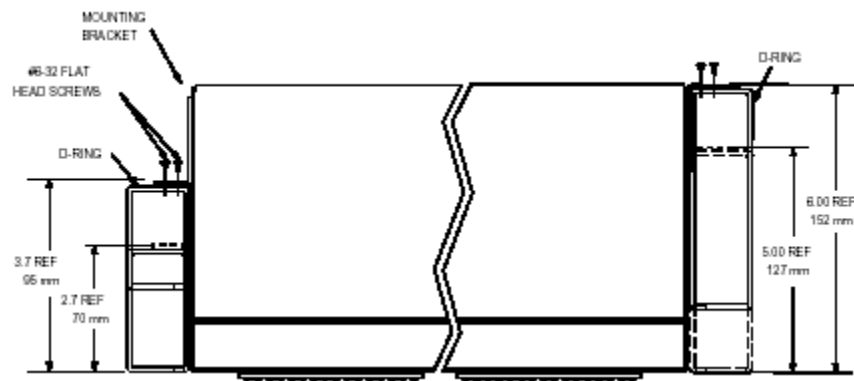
Top View—Attaching Mounting Brackets and D-Rings
